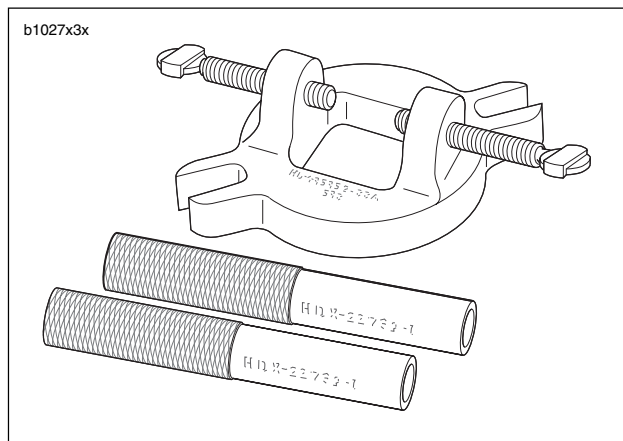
Connecting Rod Clamping Tool (Part No. HD-95952-33B)
